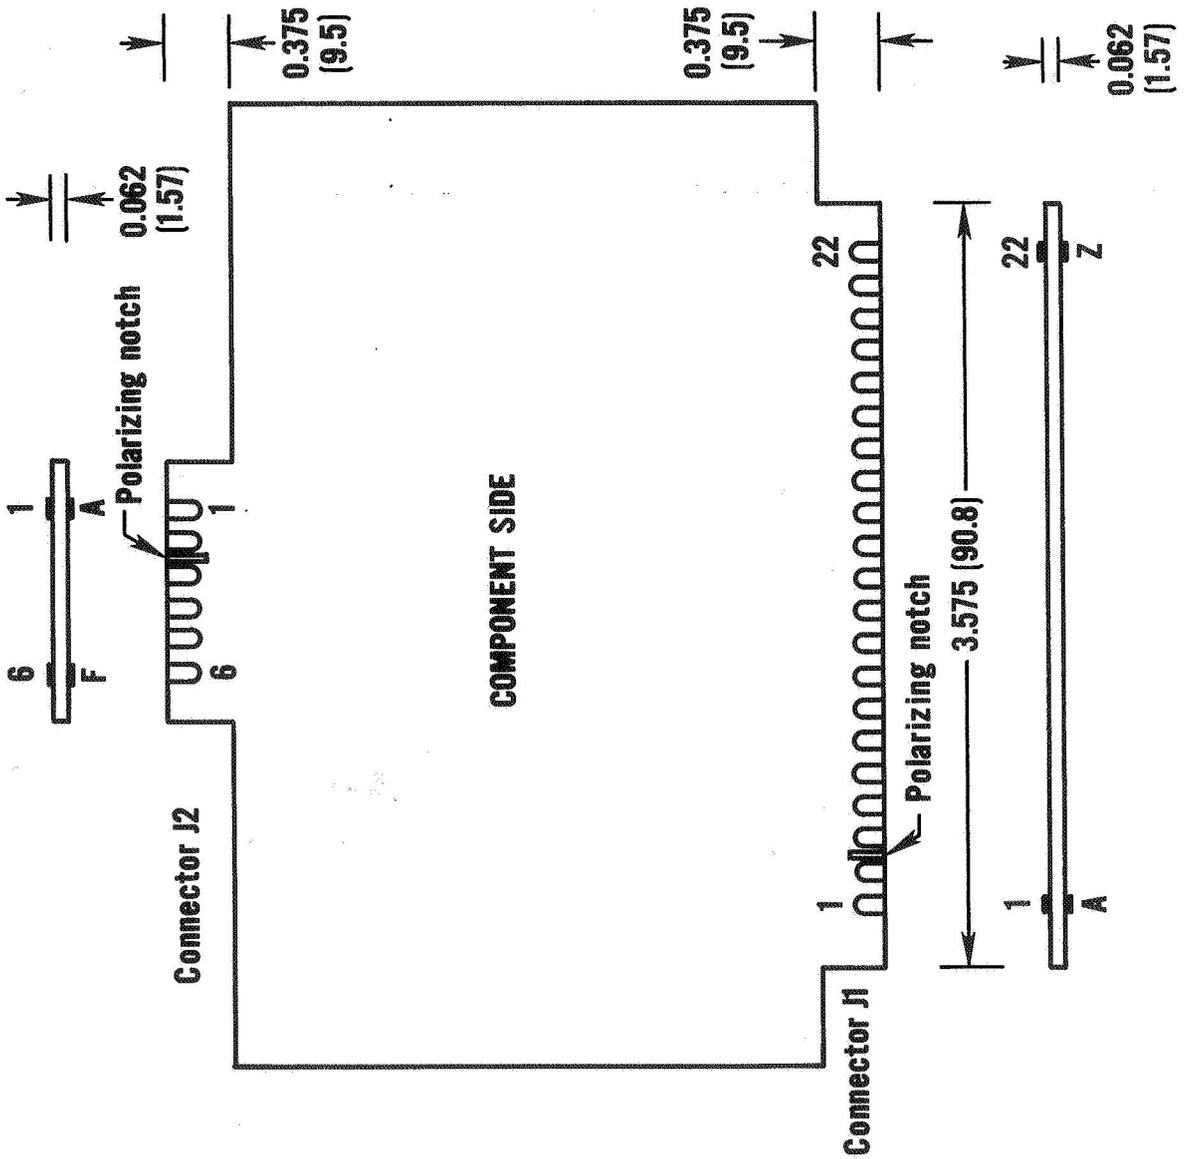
Suggested printed circuit board for test data converter (dimensions in inches and (millimeters))
